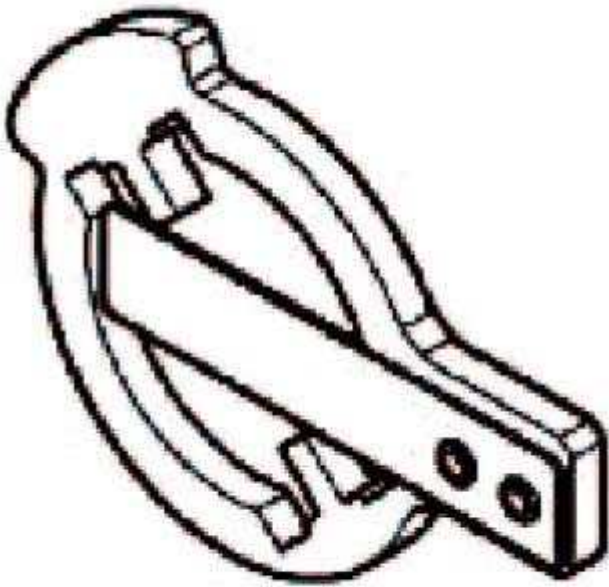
Identifying BMW Special Tools - Tool # 24 2 330
